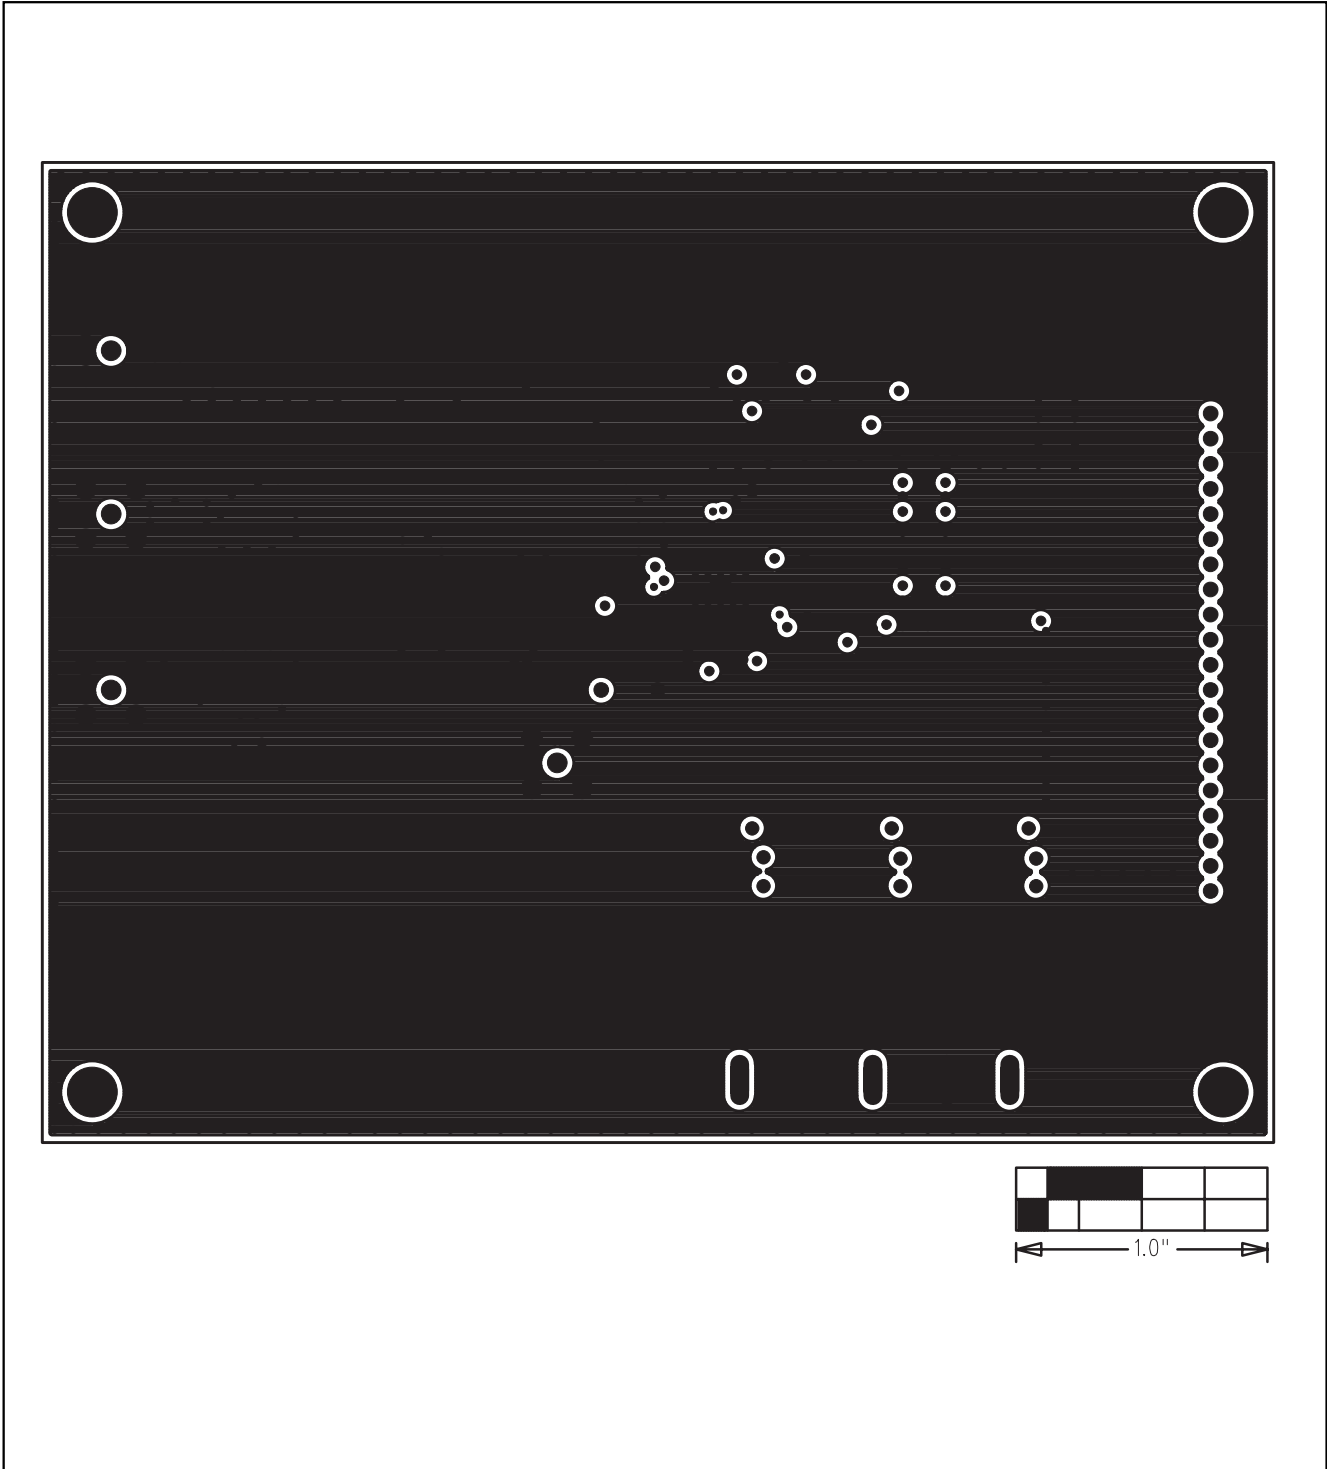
MAX1427 EV Kit PC Board Layout—Layer 5
